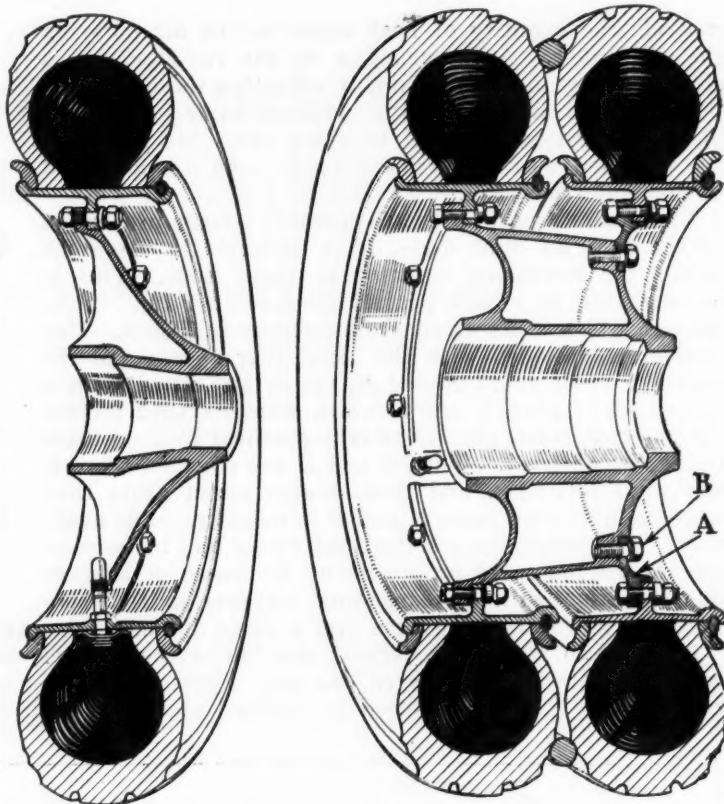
(left) — Sectional view of front wheel used on Buessing bus. The dust cover, held in place by wing nuts, is of aluminum. Fig. 11 (right) — Sectional views through front and rear wheels used on the N. A. G. bus chassis. The central portion is cast steel and the detachable rims are of aluminum
